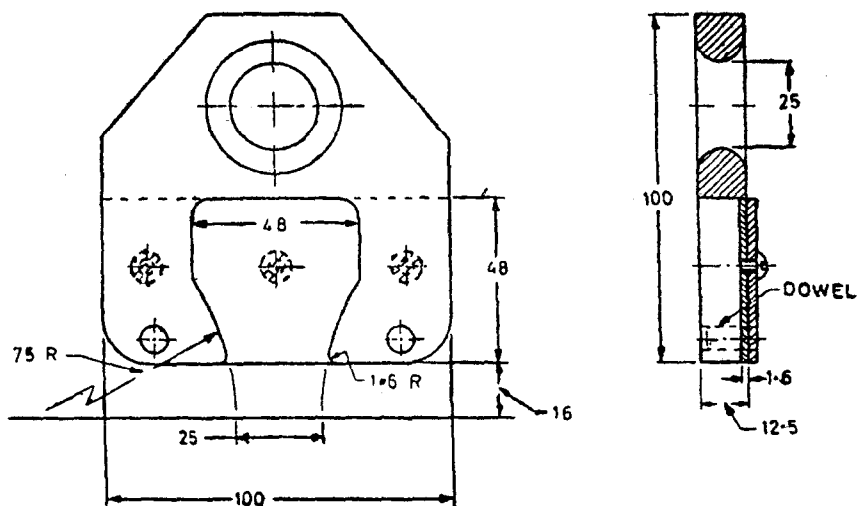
HOLDER FOR TENSILE TEST SPECIMEN
